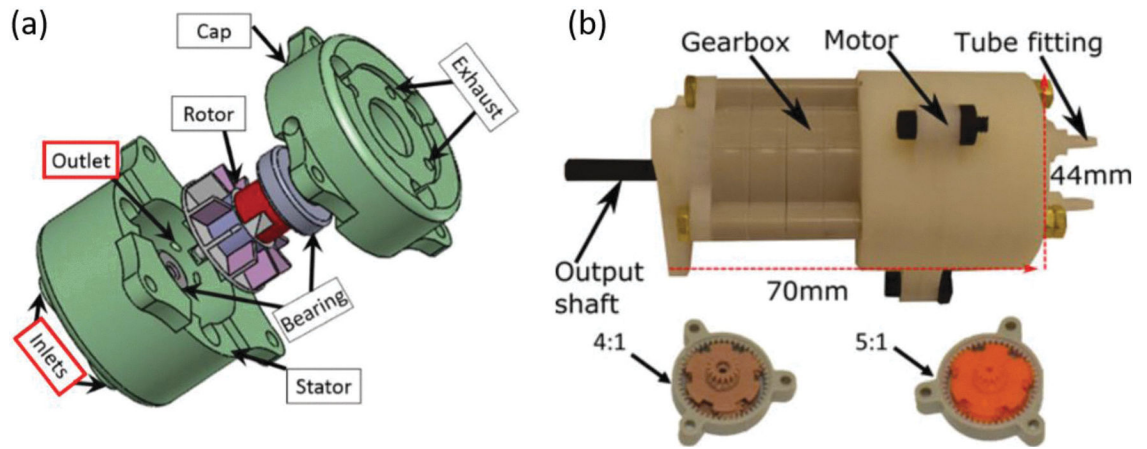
(a) Exploded view of the turbine-based motor and (b) prototype of turbine-based motor.¹²
